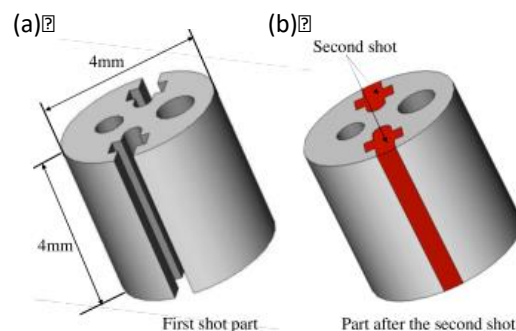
Principe for the fabrication of 3D plastronic parts with two shot injection molding [37], [38].
